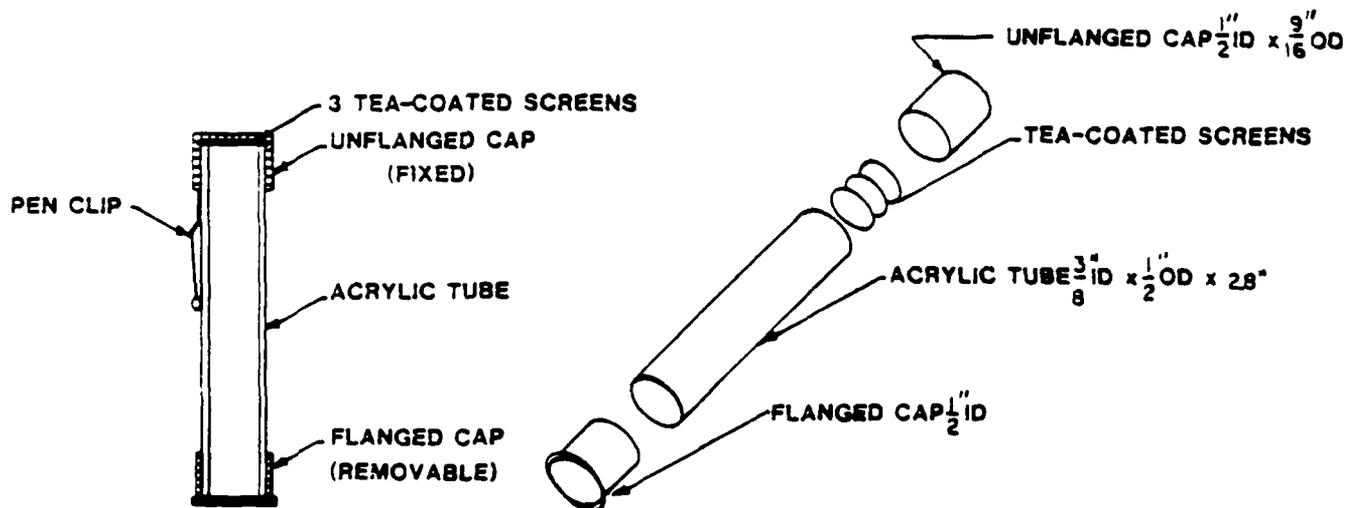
Assembled view (left) and exploded view (right) of sampler.
